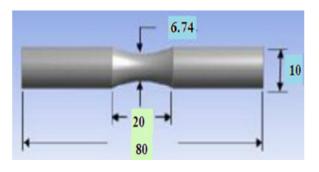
The specimen dimensions in mm according to (DIN 50113) standard values
